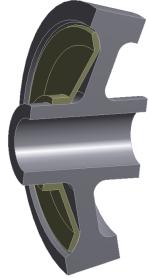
Bevel gear with frictional damper (teeth are not shown)
